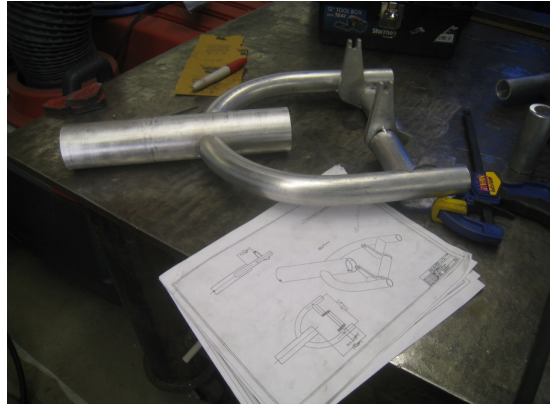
Subframe assembly tack welded and ready for final welding.
